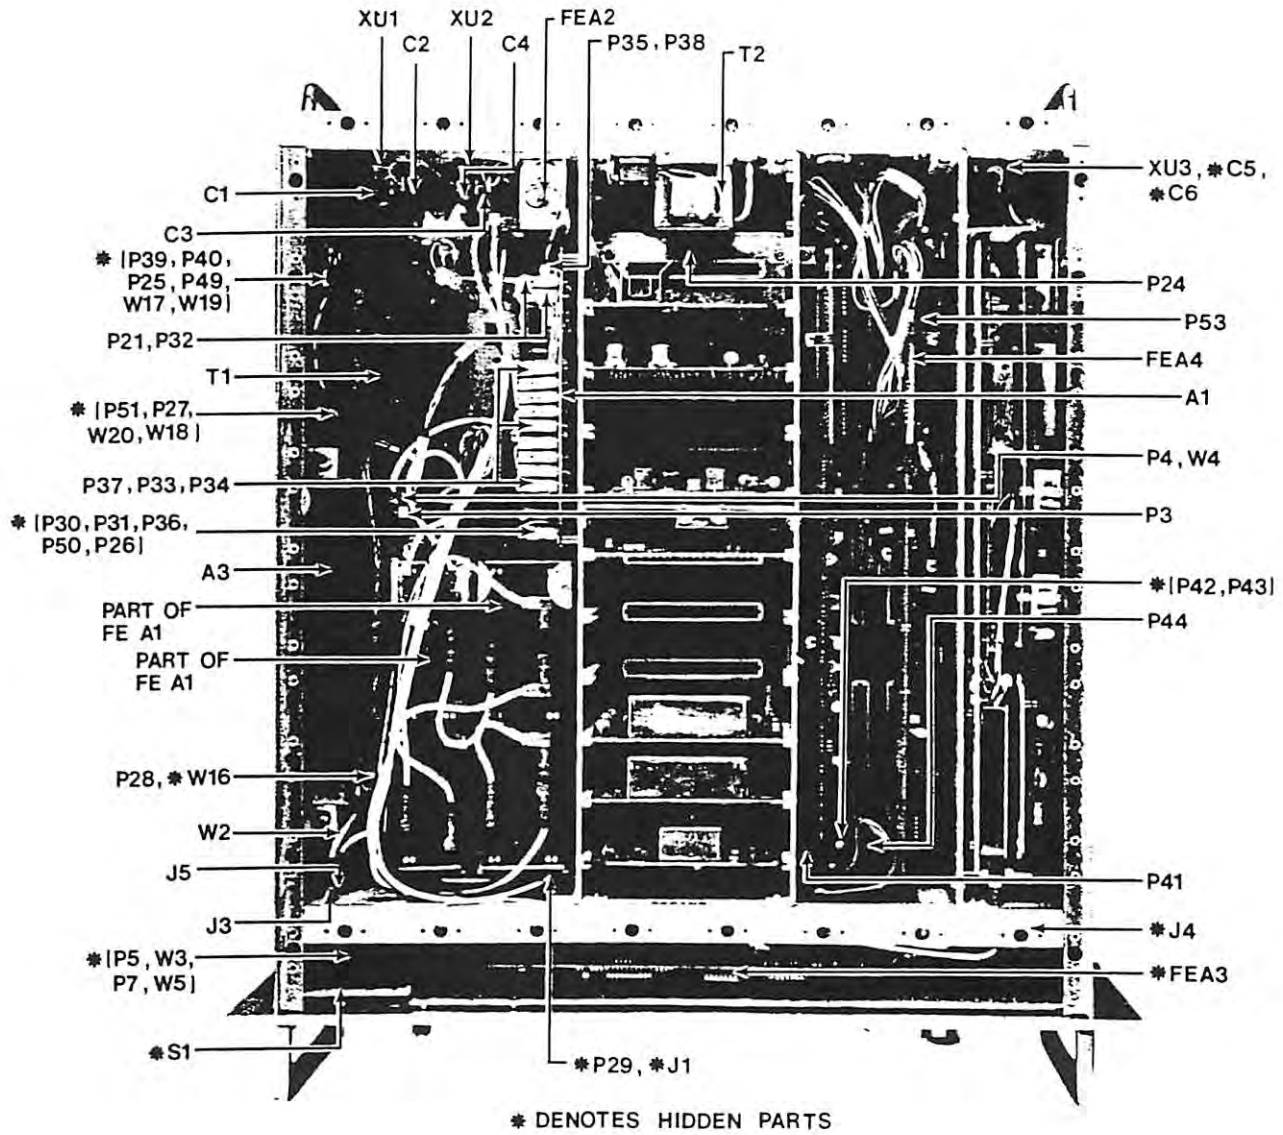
WJ-8718-19/FE HF Receiver, Top View, Location of Components(Sheet 1)
